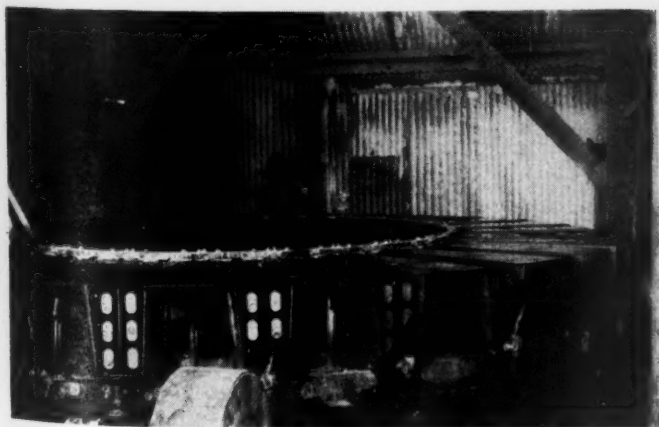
Double molding type of the rotary gypsum tile machine shown in Fig. 9
